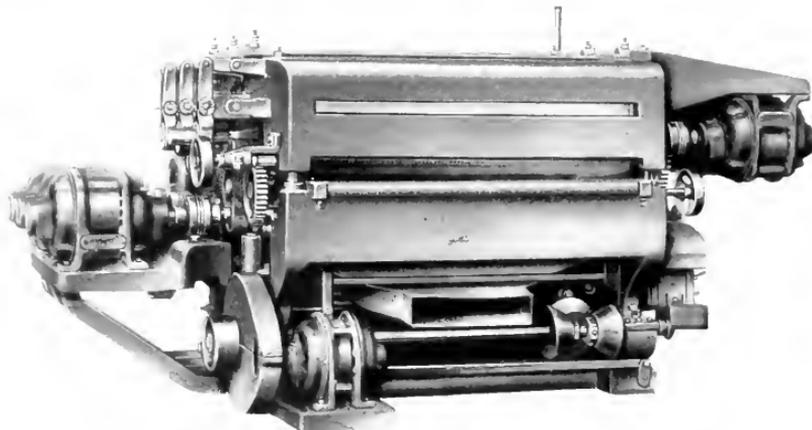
Six-drum Sander with Motors Coupled Directly to Drums, Feed Motor Below
